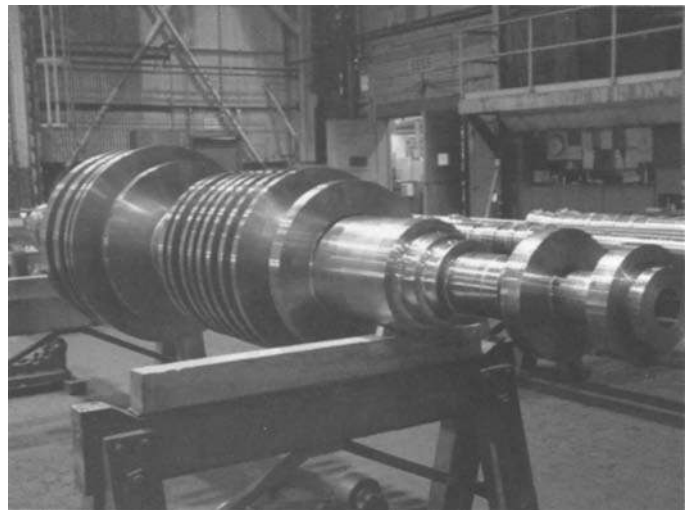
Rough machined steam turbine rotor ready for final machining and installation of the turbine blades. Mechanical test specimens have been taken from the bore shown on the right. Ultrasonic examination to ASTM Specification A 904 could be applied to a bore of this size. (Courtesy Ellwood National Forge Company)
